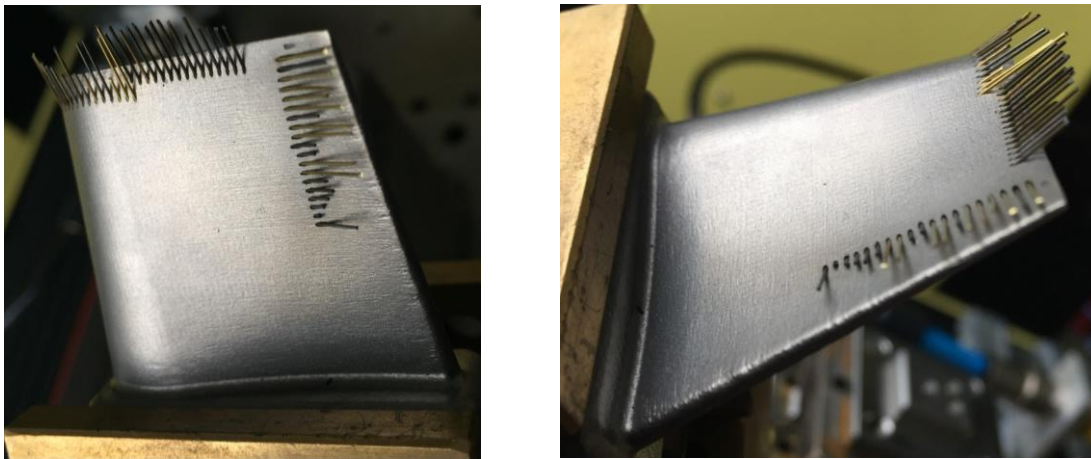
machined turbine blade specimen with calibrated jigs inserted into the cooling channels
